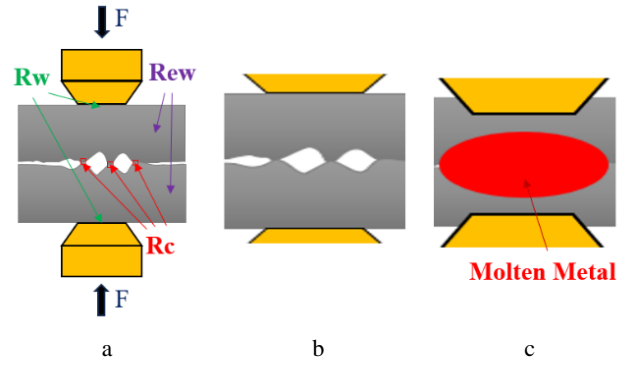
Schematic of the welding process of a joint without an interlayer: a – before welding; b – in the welding process; c – the nugget morphology after welding
